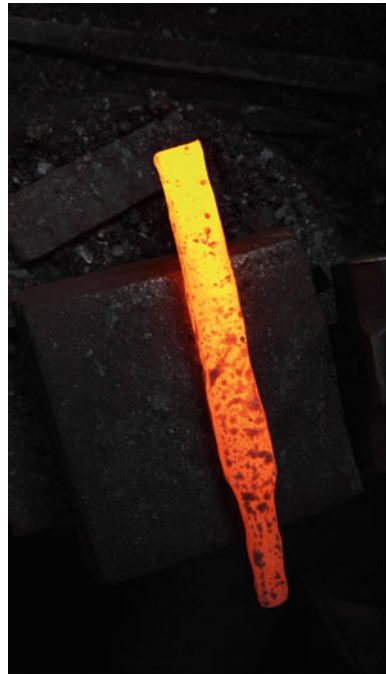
The three-layer composite steel that was used for forging the blade
